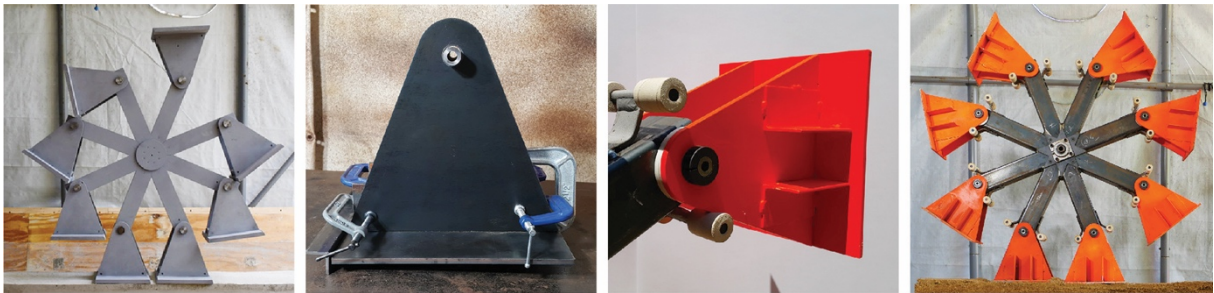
Roto-Tamper 01 evolved from a wooden prototype used to determine the overall dimensions of the various parts (L) to a steel machine that was employed to make a rammed earth wall test (R). Through this process, fabrication technologies were assessed for accessibility, and unforeseen components – such as noise dampeners – were designed on the fly. RT-01 did not actually roll, it stepped. Source: (Author 2023)
